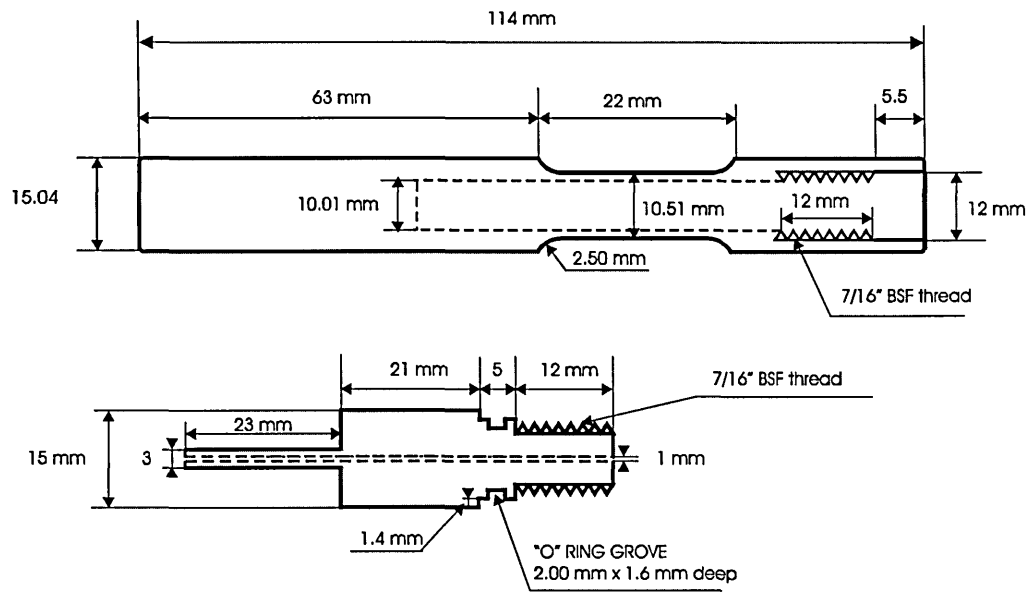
Dimensions of the tubular SRET specimen used to perform simultaneous corrosion fatigue - SRET tests .
